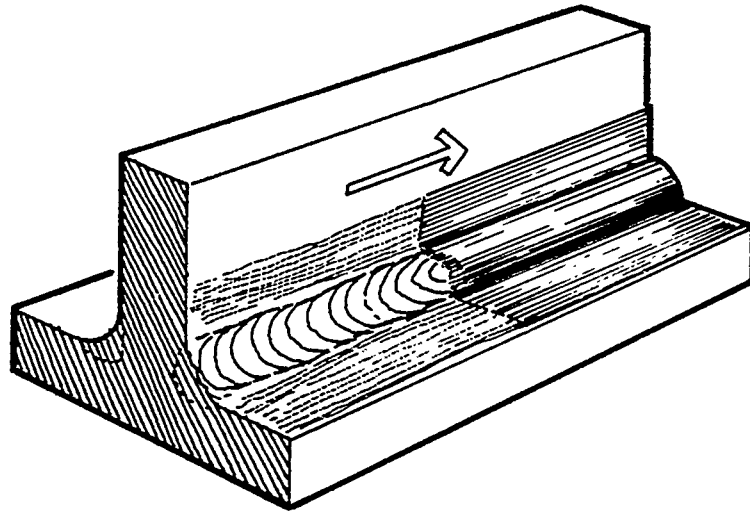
SCHEMATIC OF FIRECRACKER WELDING
